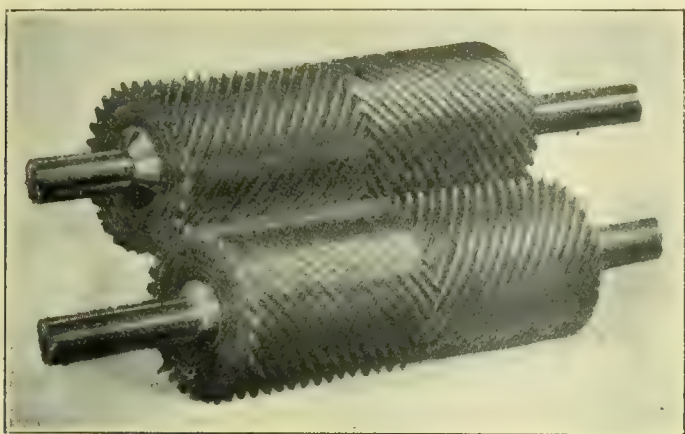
"SPIRO" ENGINE WITH ROTORS REMOVED FROM CASING.
